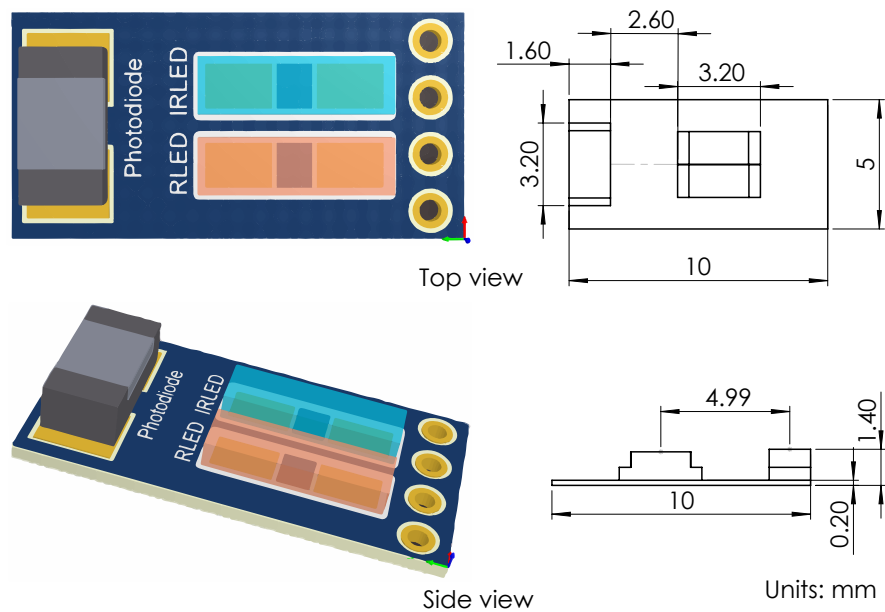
The 3D model and mechanical drawing of the optoelectronic reflectance sensor used in the smaller version (10 mm) of the RECAP probe I.
